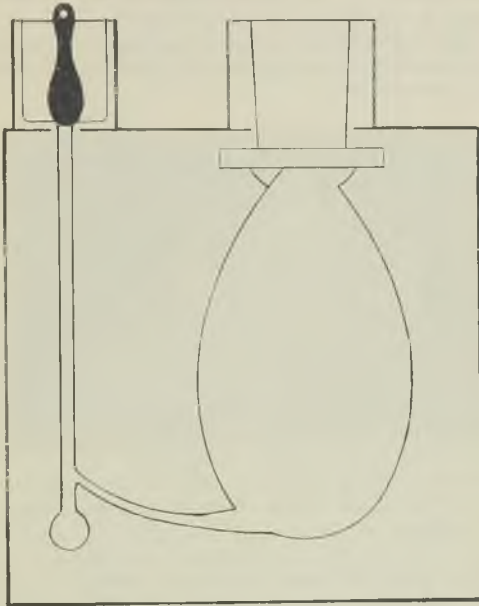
METHOD OF CASTING A PROPELLER BLADE.
